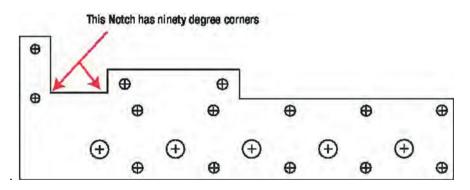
The building plan shows notches with crisp ninety degree corners.
